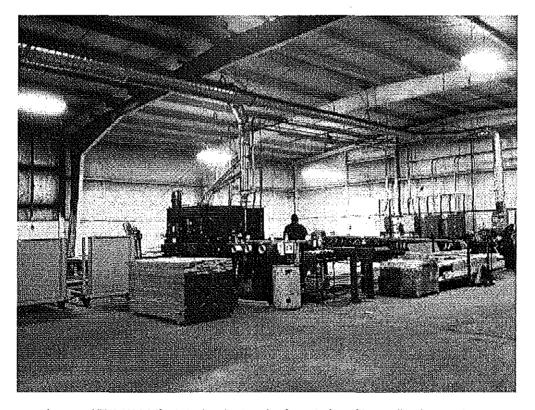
(7/24/2014): Interior ductwork of waste handling collection system.
